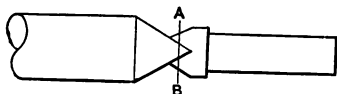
Principle of Brown and Sharpe Thread Micrometer
